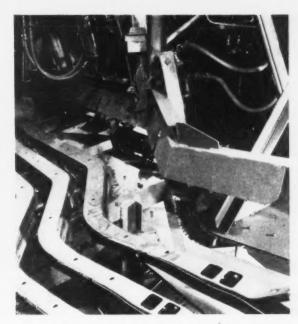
After welding, spring-wire teeth remove the fused flux in a descaling fixture. The fused flux drops through a trough, is conveyed to a recovery unit, crushed, graded for particle size and re-used.
